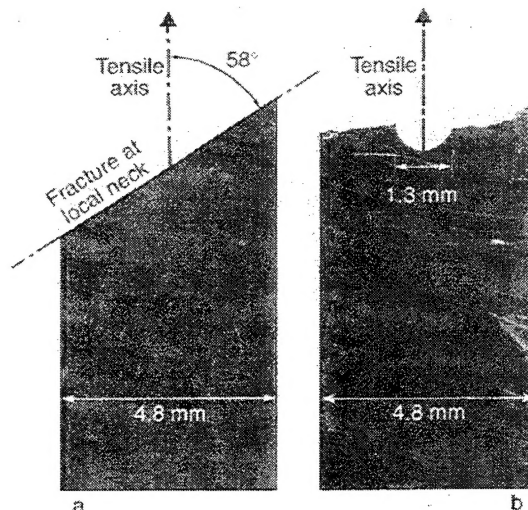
Photographs illustrating typical macroscopic fracture paths for tensile tests performed in air. (a) A transverse specimen and (b) a notched longitudinal specimen of the PM alloy are shown.
